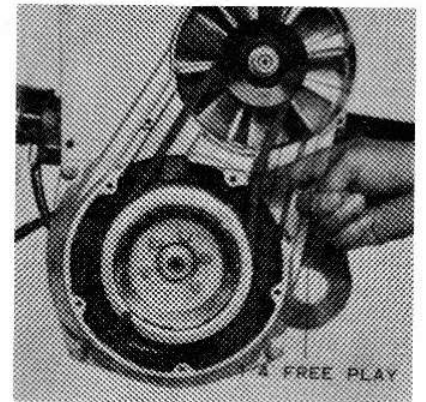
Cooling fan drive belt should have 1/4-inch free play when depressed with finger as shown.
